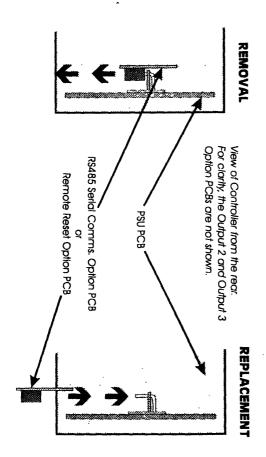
Removing the RS485 Serial Comms Option PCB or Remote Reset Option PCB
